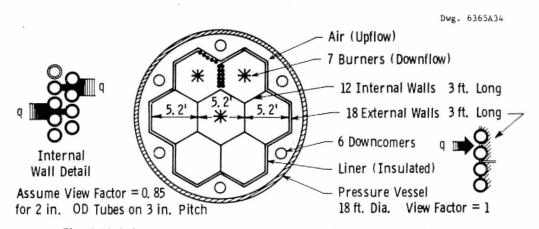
Proposed layout of vaporator section (water walls)
